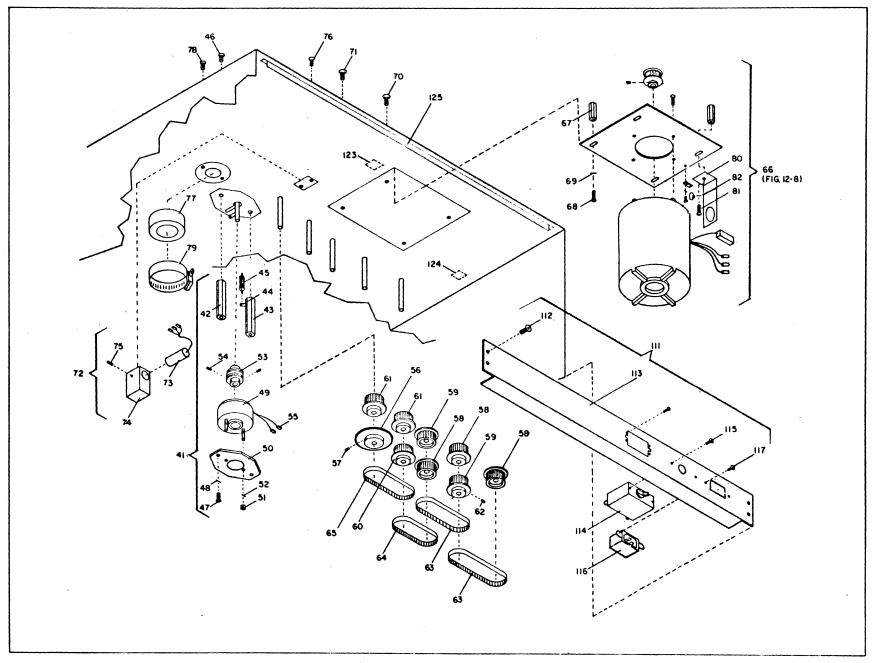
MAIN FRAME ASSEMBLY (sheet 2 of 3)
